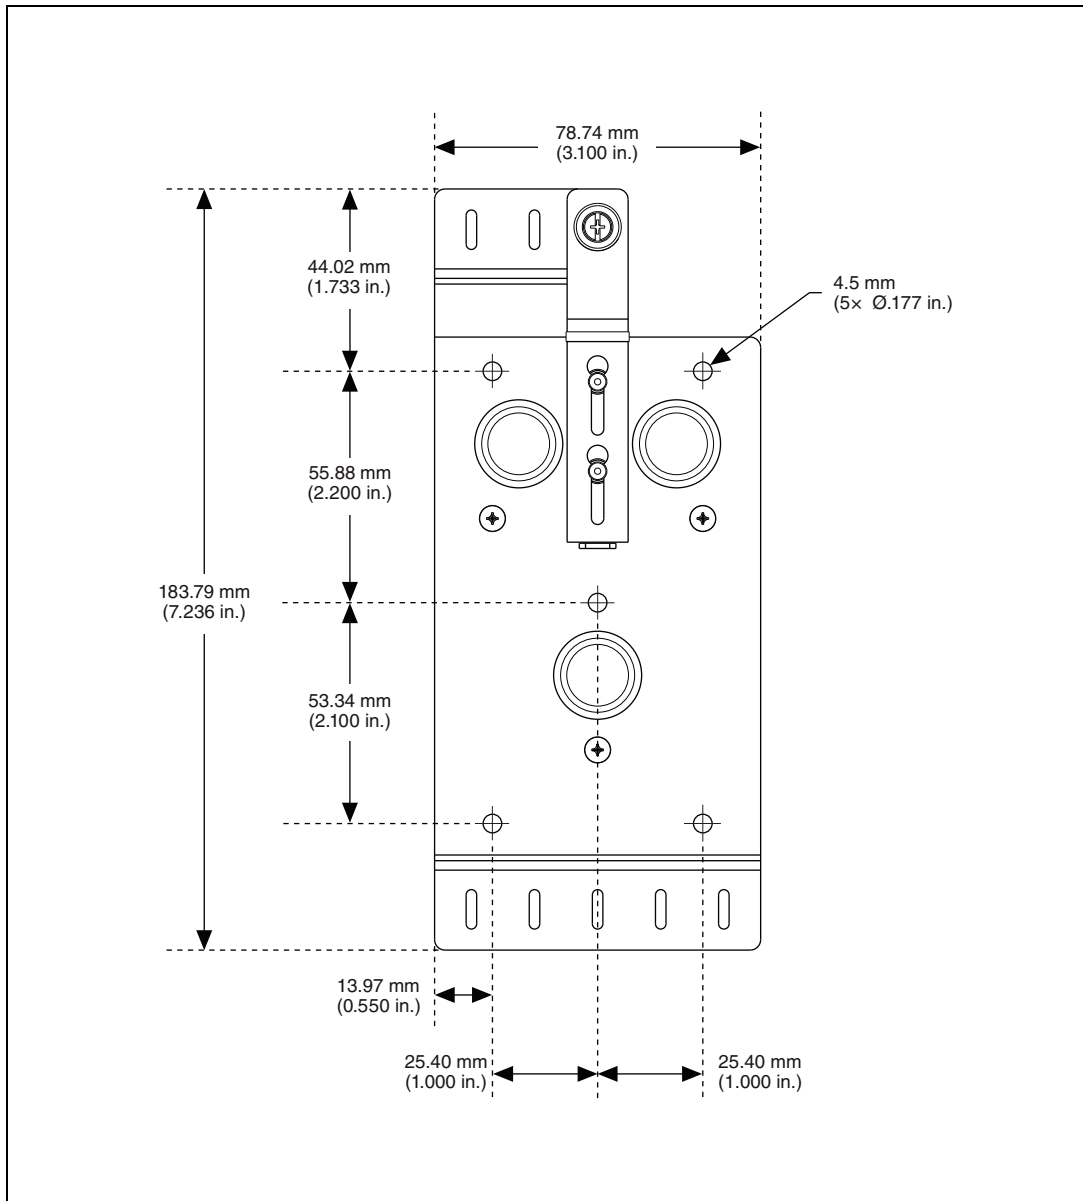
NI WSN-3214 Device Panel Mount Dimensions
